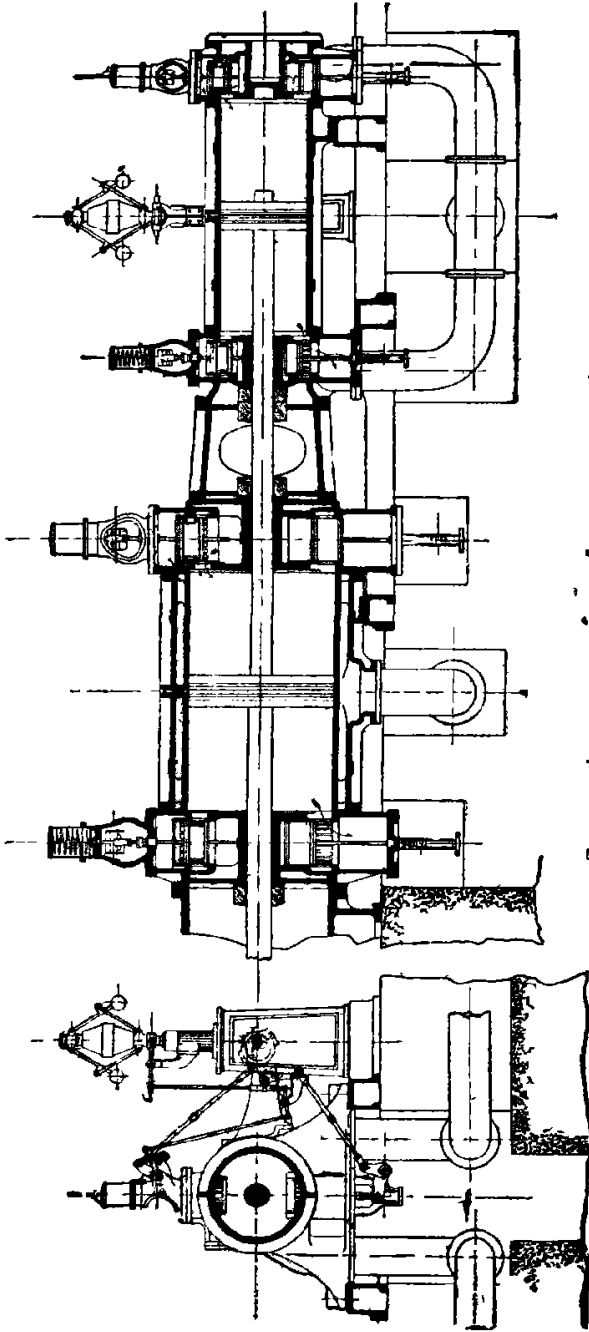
CYLINDER AND STEAM VALVE GEAR
